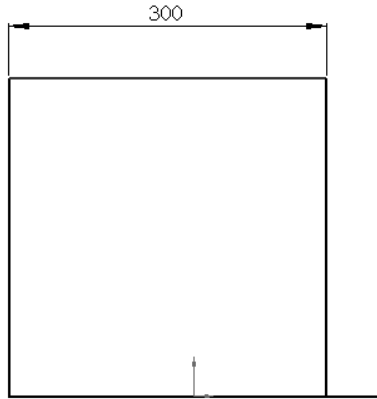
Modified sketch of the edge flange Figure 16-137 Model after creating edge flange
